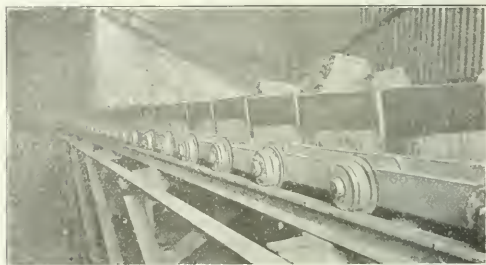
ROLLER BEARING SUPPORTING WHEELS OF CONVEYOR
